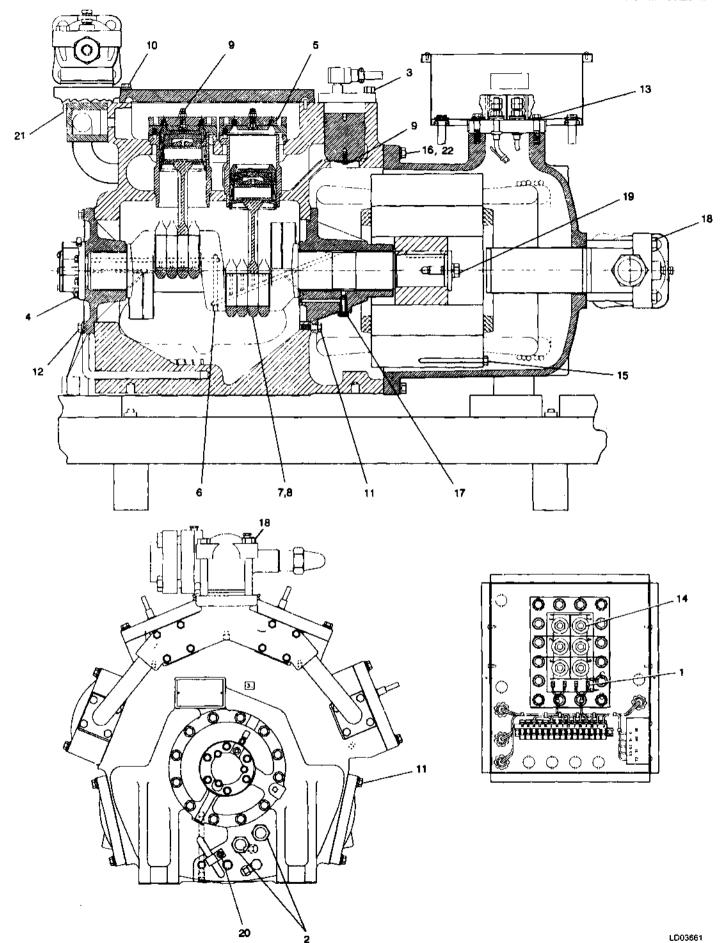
B - FASTENER LOCATIONS ON JG COMPRESSOR
